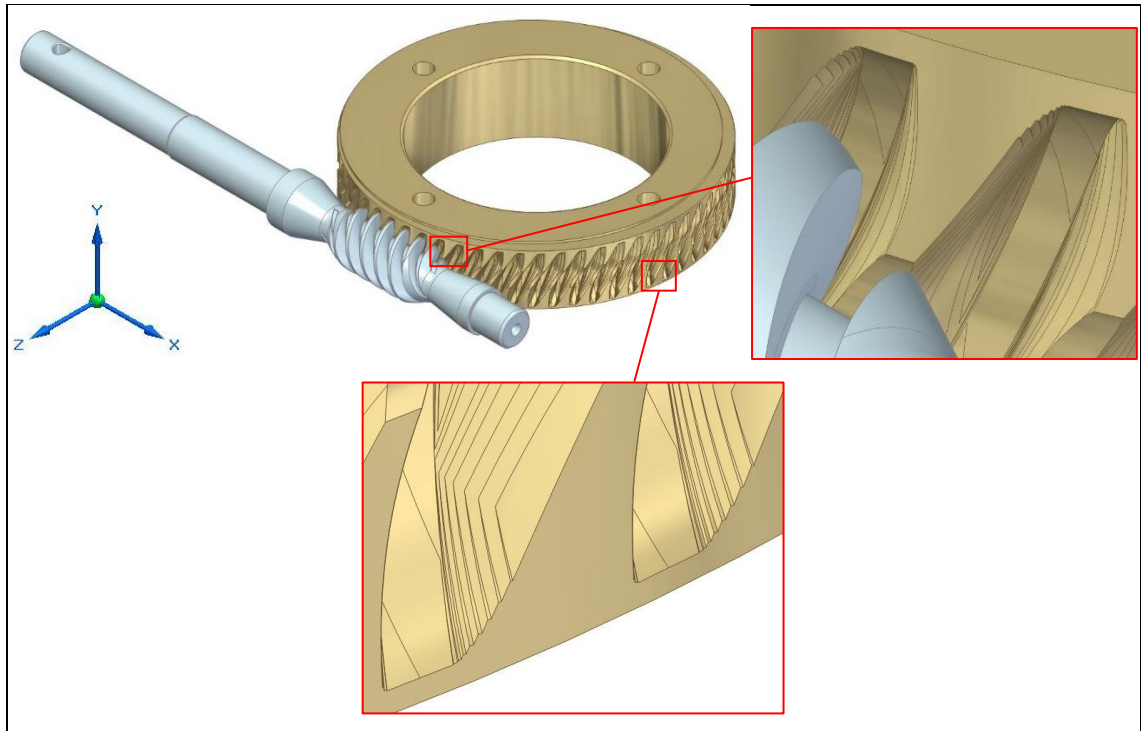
CAD model of worm gearset 3. Facets on tooth flanks of wheel gear caused by machining simulation.
